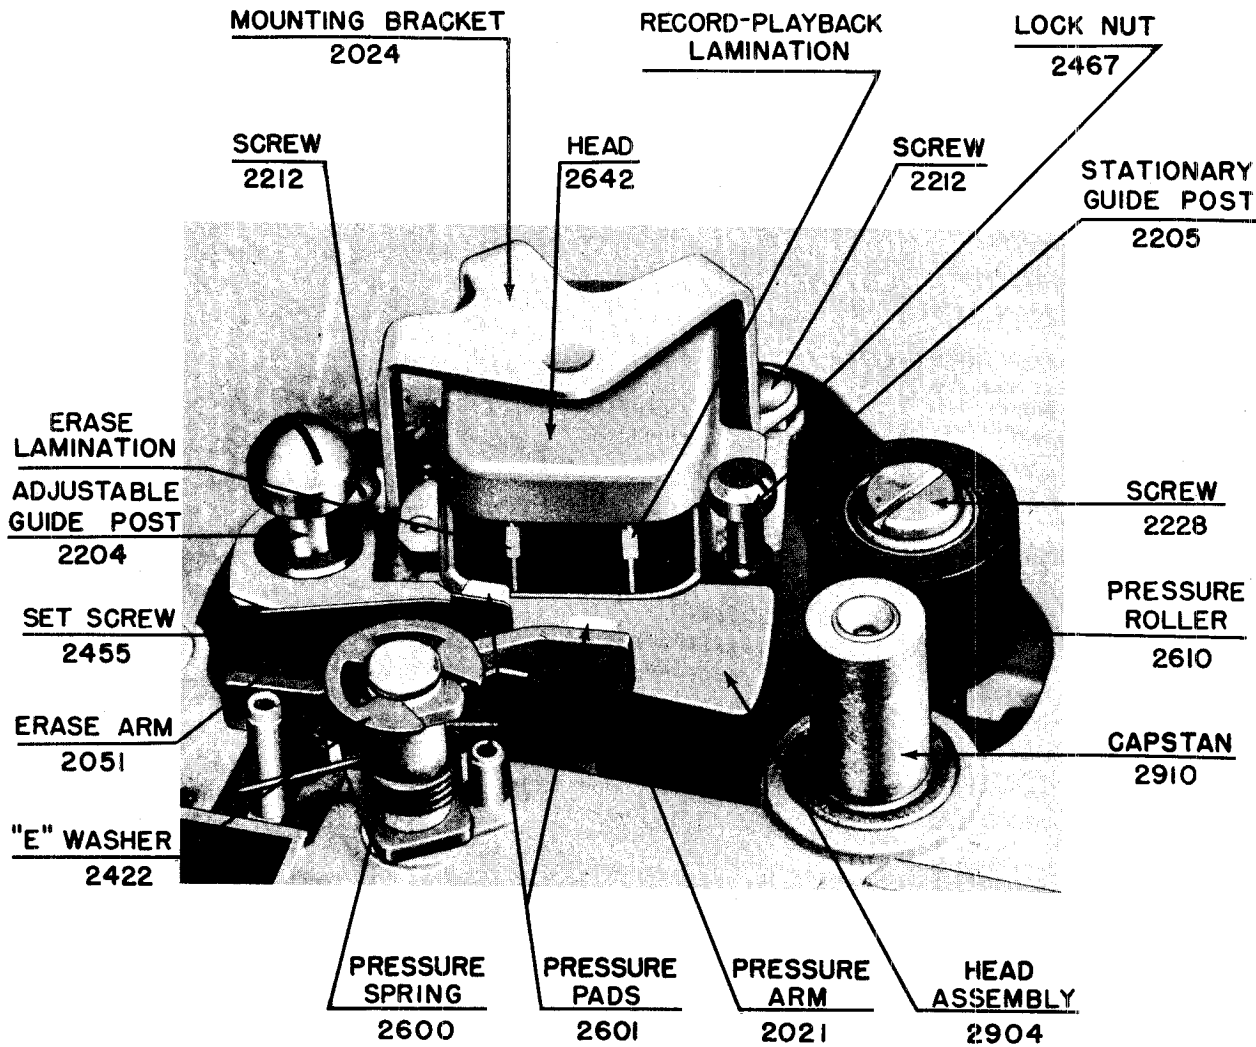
Recorder with Head Covers Removed Showing Head Mechanism.
